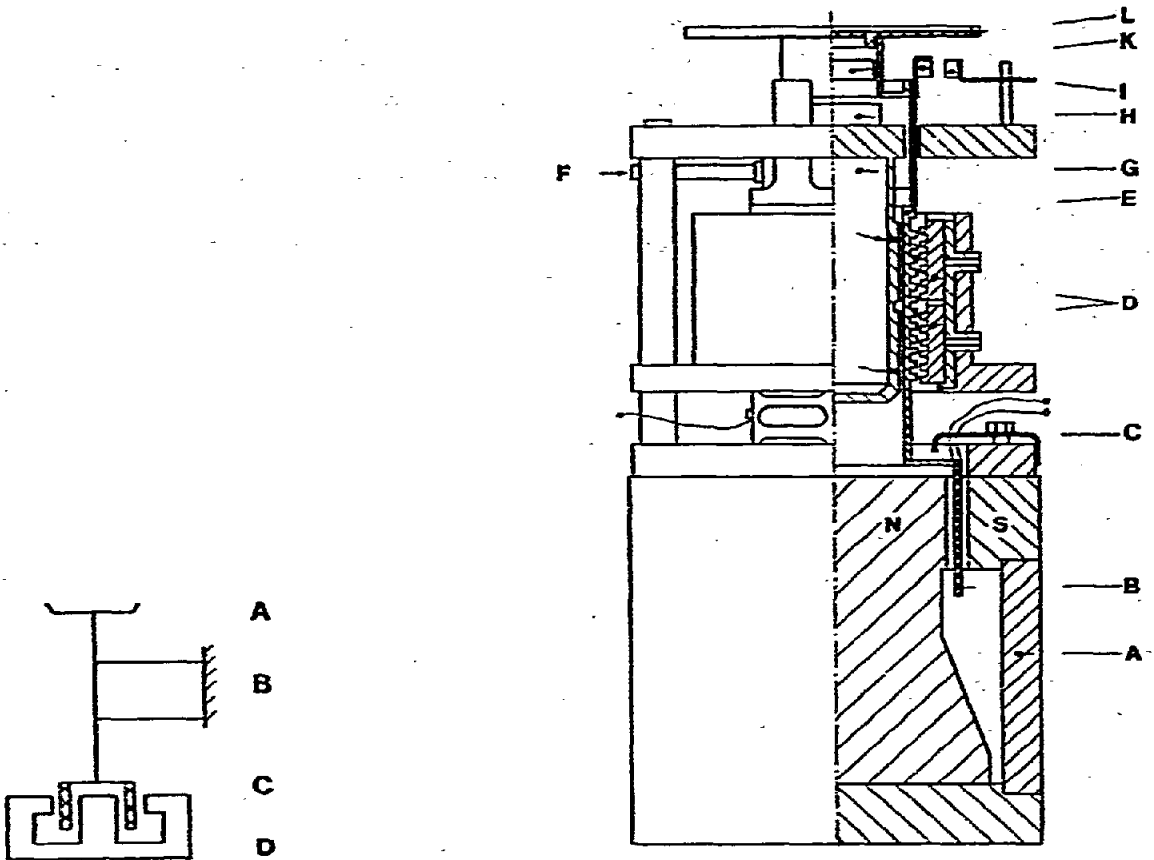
Schematic diagram of a load cell. A = pan; B = parallel spring plates; C = coil; D = pot-shaped magnet.
